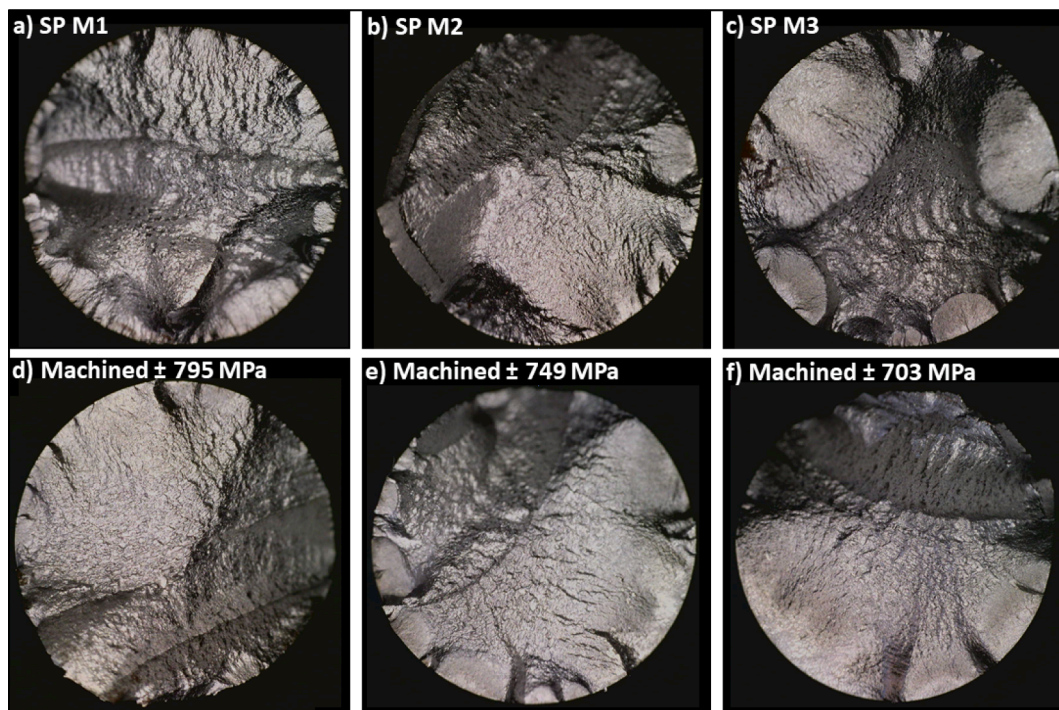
Fracture section of SP samples (a, b & c) and machined samples (d, e & f).
